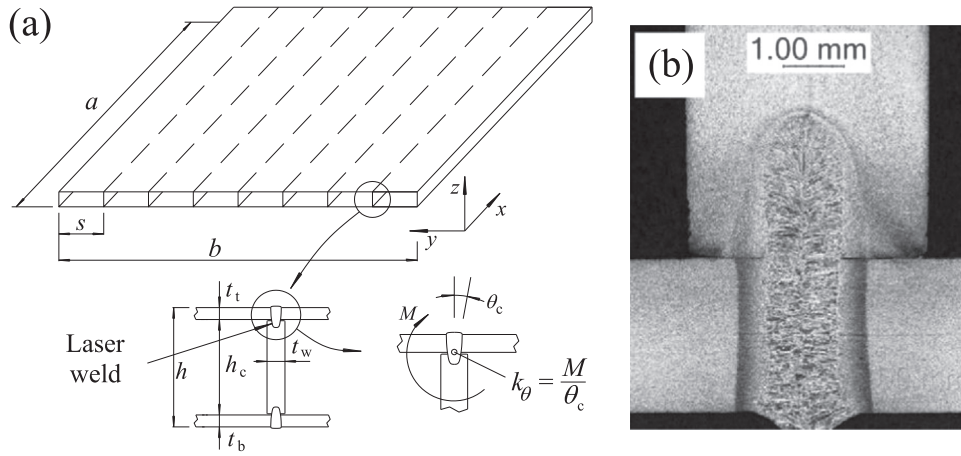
(a) A laser-welded web-core sandwich panel; (b) T-joint with laser weld.
